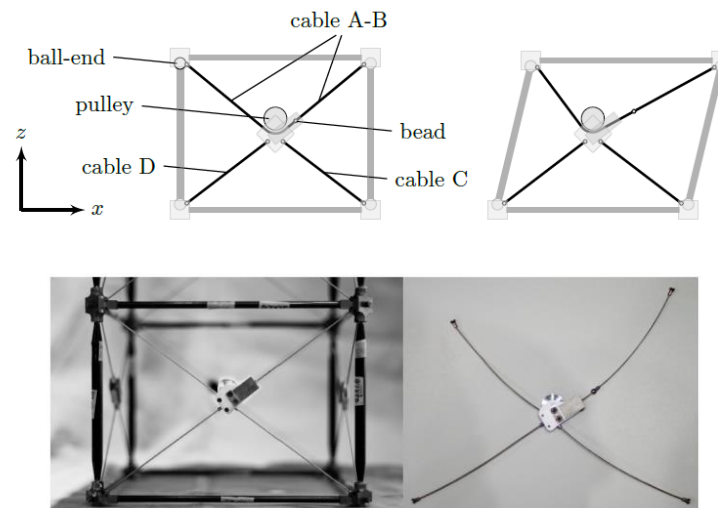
Assembly of diagonal cables with integral bead-capture latch.
